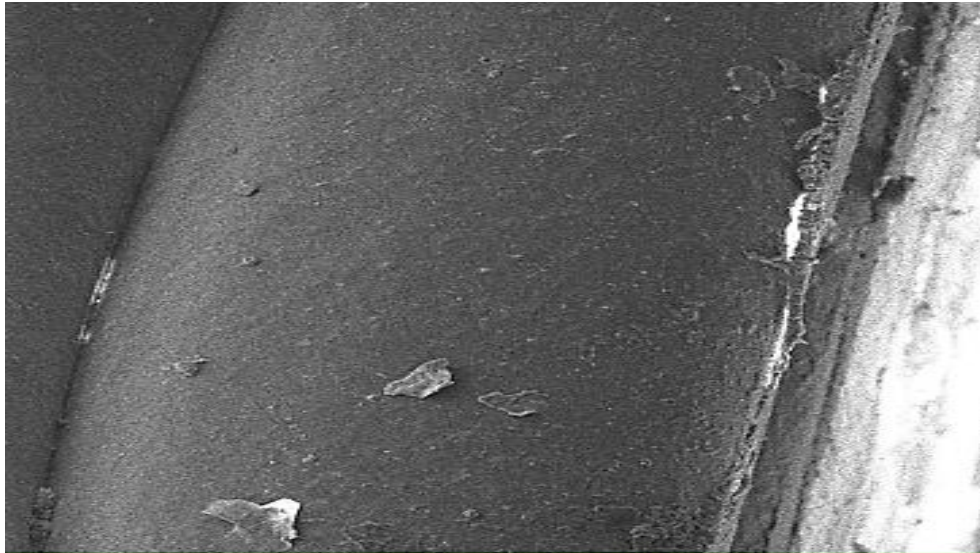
Initiation Zone and propagation of the fracture surface
